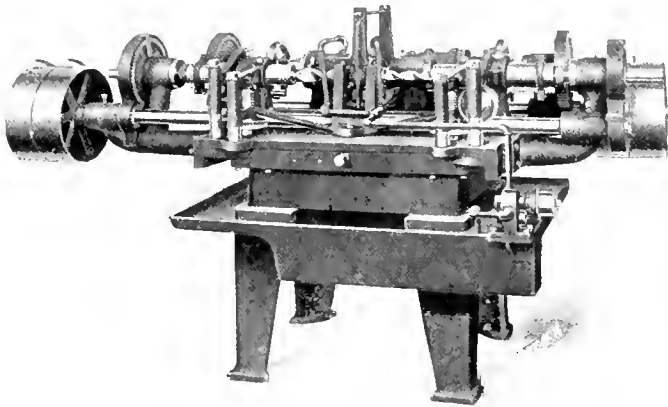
Rear View of Connecting-rod Drilling and Facing Machine
